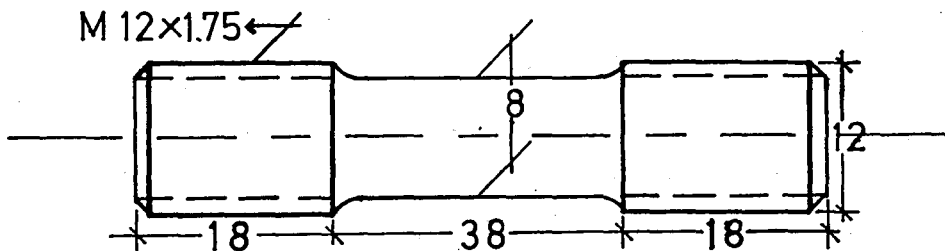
TS-138 J-8b type tensile specimen (in mm)
